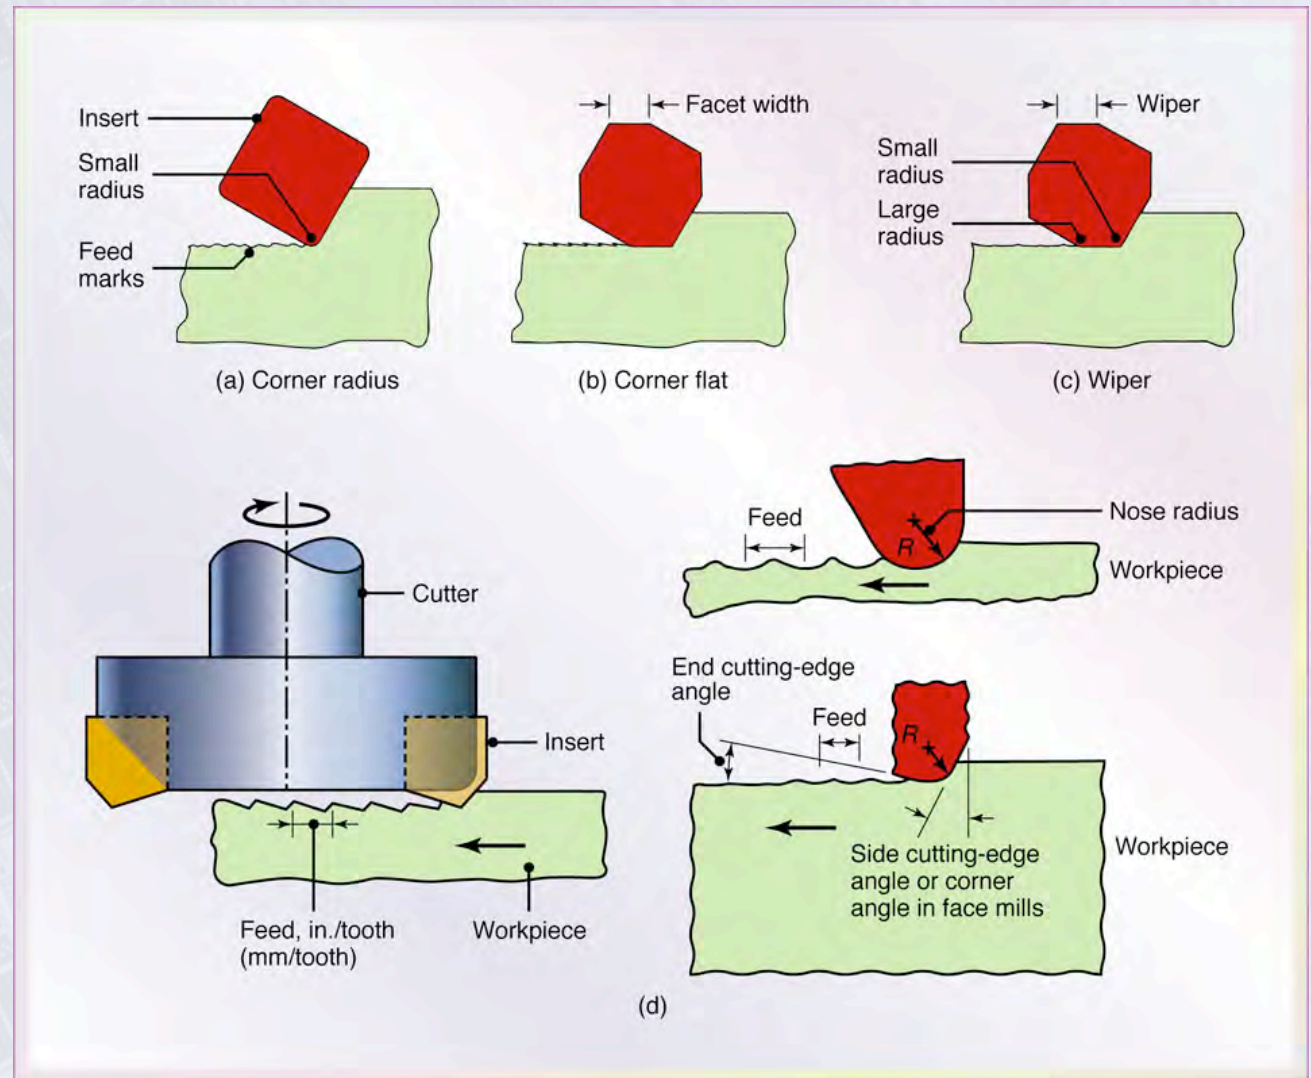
Schematic illustration of the effect of insert shape on feed marks on a face-milled surface: (a) small corner radius, (b) corner flat on insert, and (c) wiper, consisting of small radius followed by a large radius which leaves smoother feed marks. (d) Feed marks due to various insert shapes.
